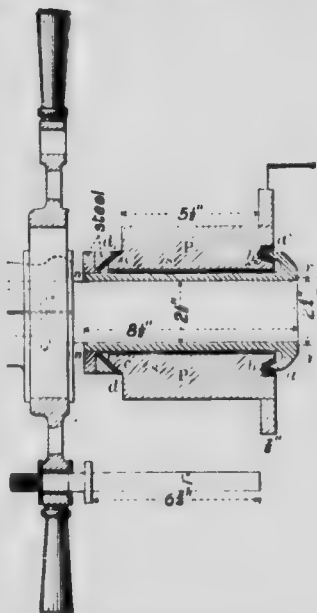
Commutator of Johnson and Phillips' Bipolar Machine.
